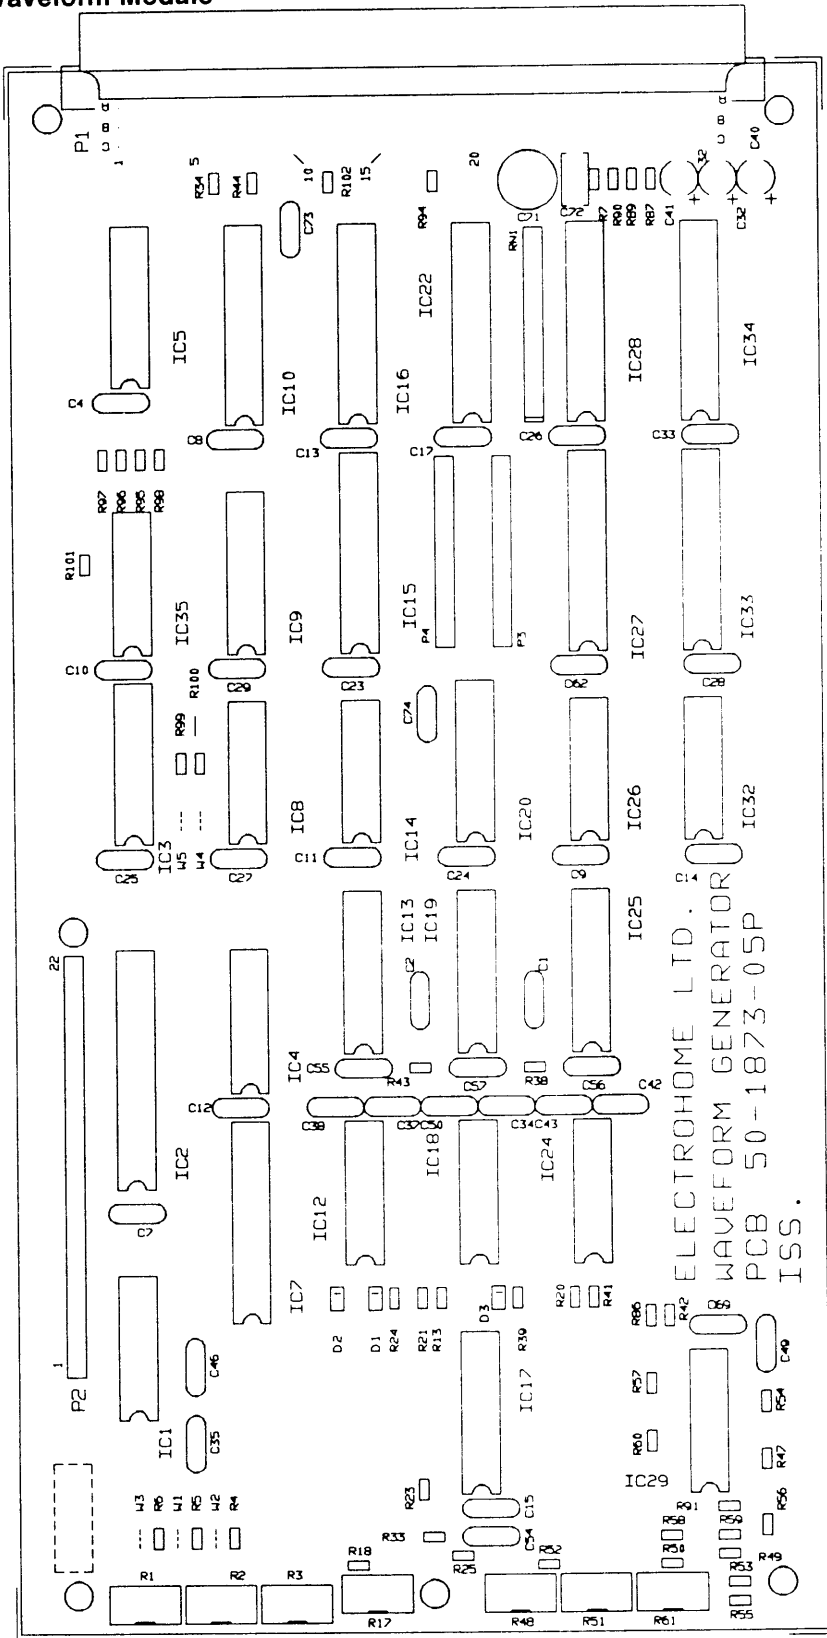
Waveform Module Alignment/Daughter PCB Removal
